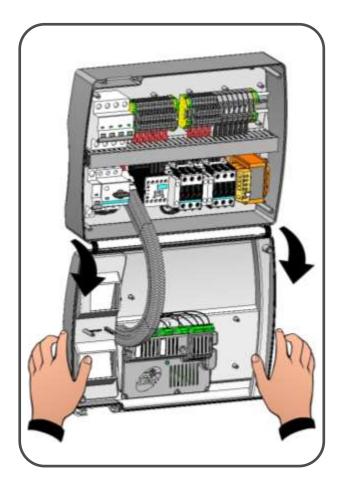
Undo the 6 CPU board cover fixing screws: remove the board from the frontal part of the box in ABS.
